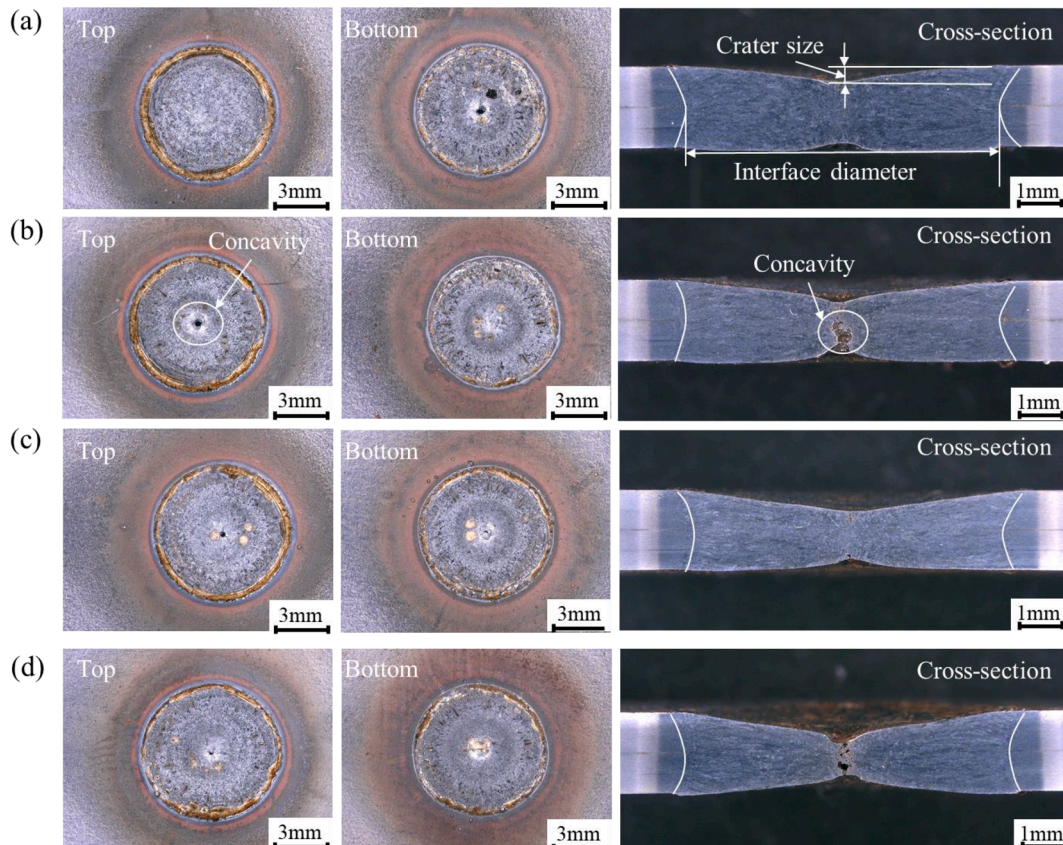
Morphology of remote laser spot welds with different laser powers: (a) 2400 W; (b) 2800 W; (c) 3200 W; (d) 3600 W.
